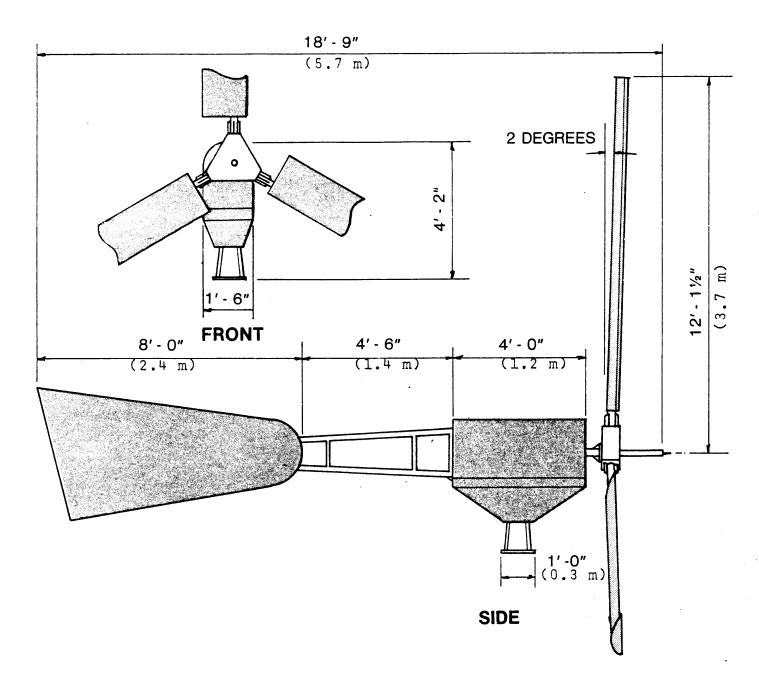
Millville Windmills' 10 kW mill, a horizontal axis, upwind turbine.
